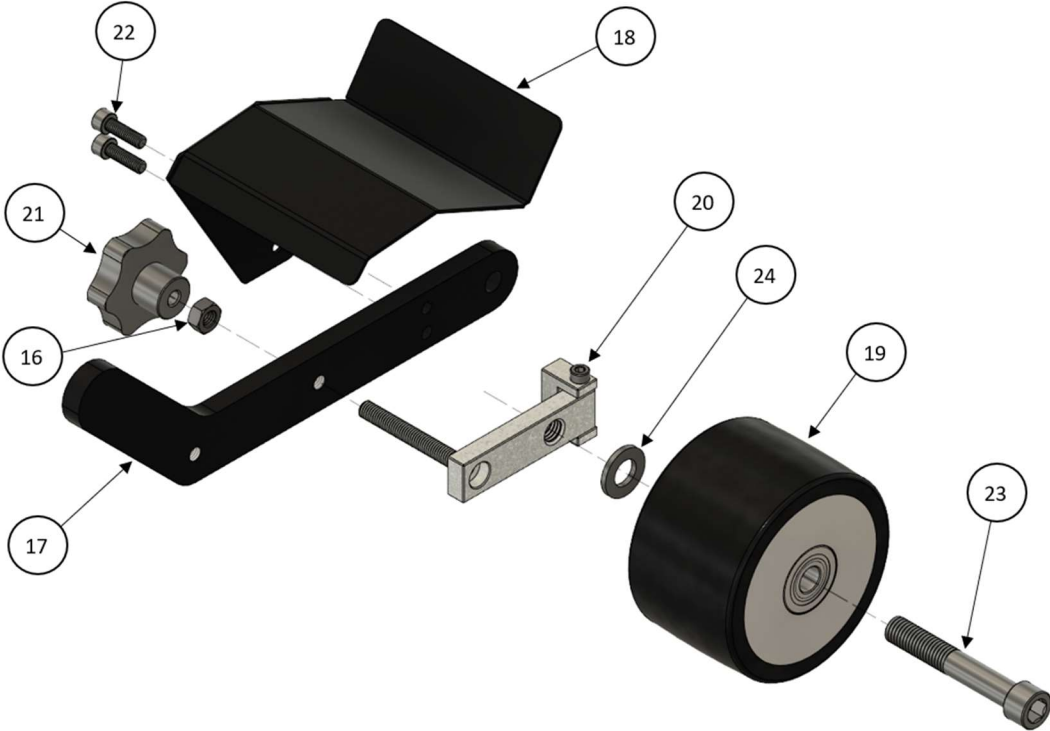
48” Platen Assembly (refer Table 2 for parts list)
